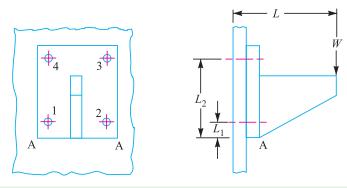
Eccentric load perpendicular to the axis of bolts.
